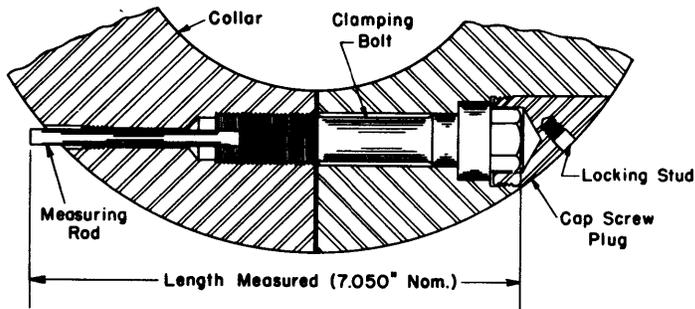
Arrangement of Clamping Bolt, Plug, and Measuring Rod used in 0.3-Scale Clamping Model
